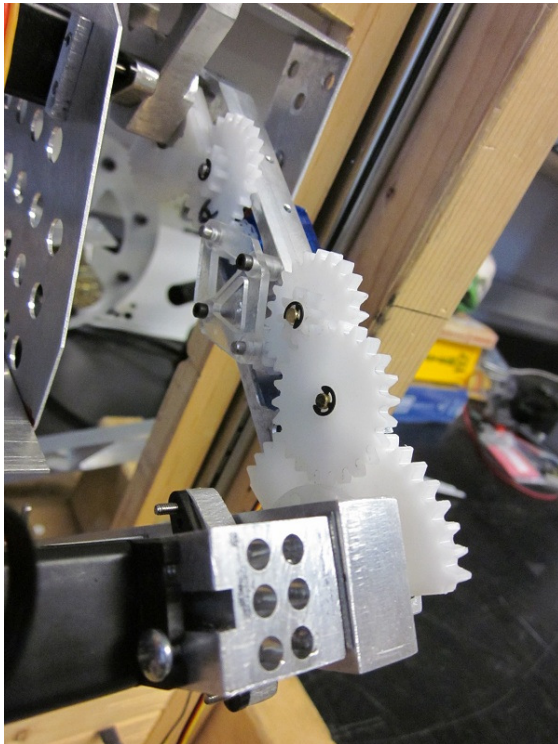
Photo of the gear train that controls the bias of right-knee torsion spring. Gears are machined delrin.
